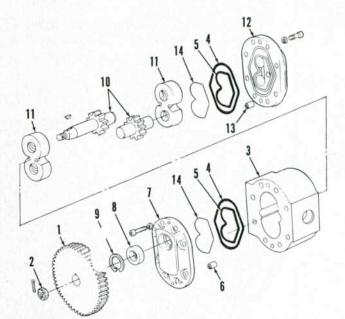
Main hydraulic pump is mounted to backside of pump adapter plate (3) located on right-hand side of rear axle center housing. Differential lock valve (7) is not used on Model TW-35.
